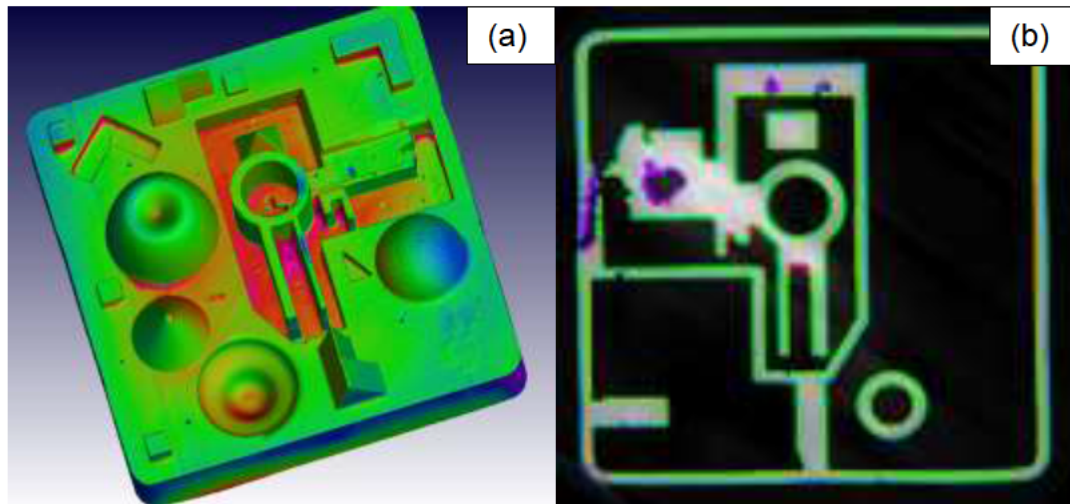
Casting defects on a casting: (a) 3D view (a) and (b) sectional view
